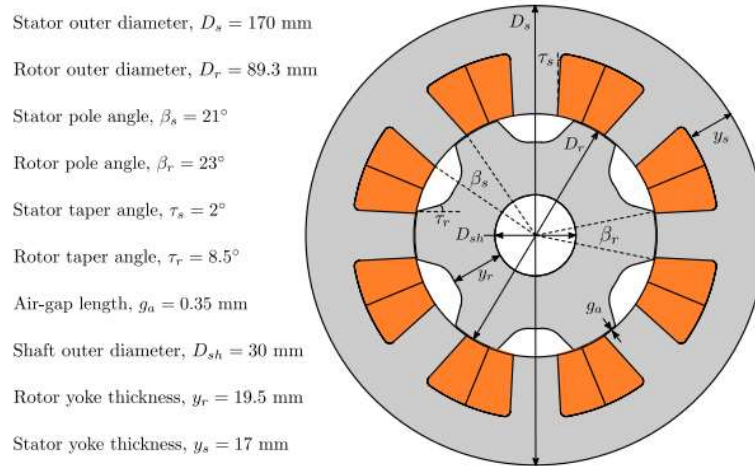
Baseline 8/6 SRM stator and rotor dimensions [53]
